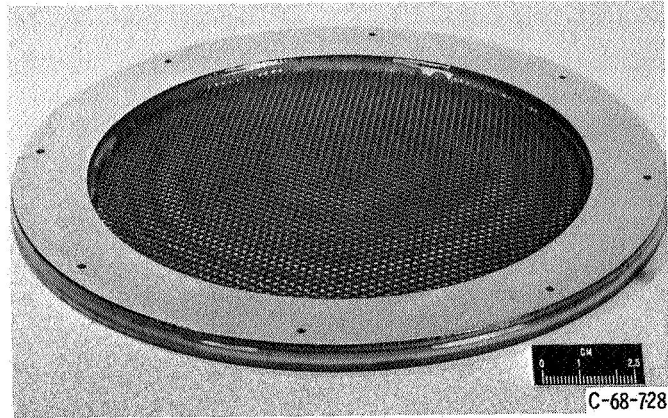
Dished fused glass composite grid with integral electrically isolated retaining assembly.
